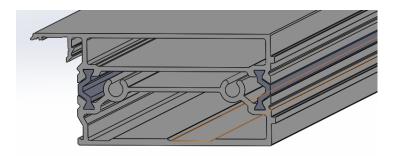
Cross-sectional view of the tube stile, showing the screw locations directly integrated to the metal profile.
